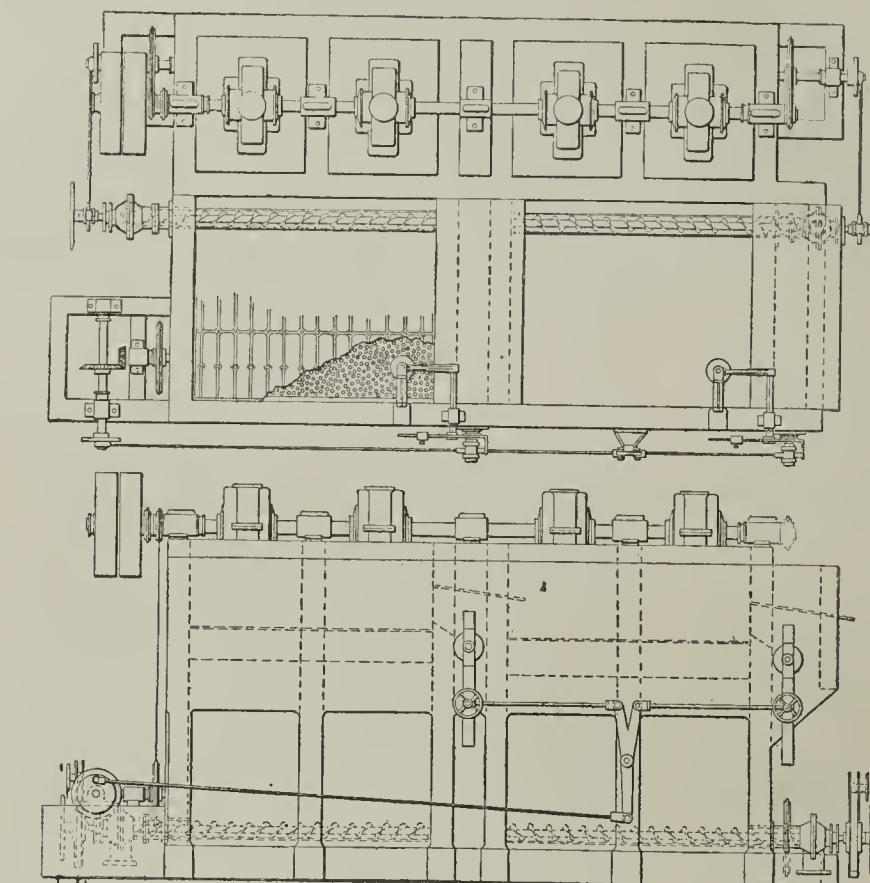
PLAN, SIDE ELEVATION AND SECTION OF JIGGING MACHINE OF LARGE CAPACITY PROVIDED WITH A CONCRETE TANK.
